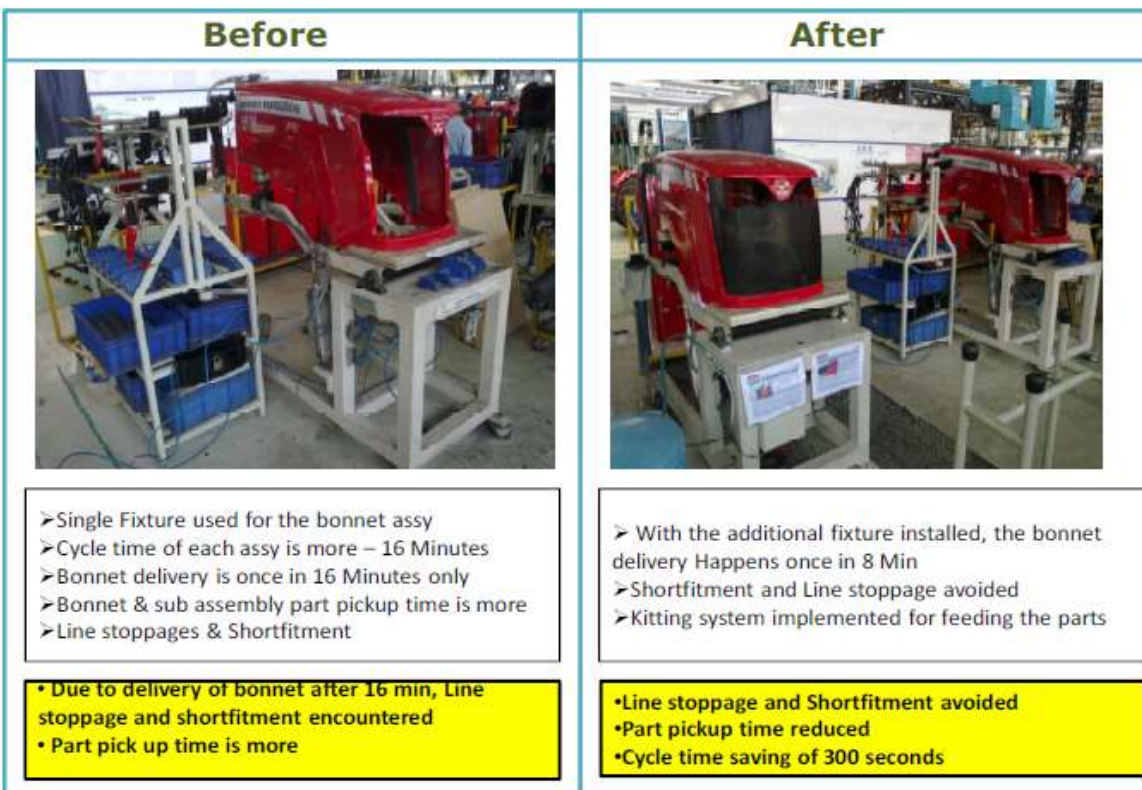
Cell 5- Stage 20 – Bonnet Sub Assembly Layout Change
